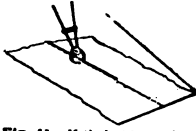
Method of holding flanged thin sheets in position for welding.
